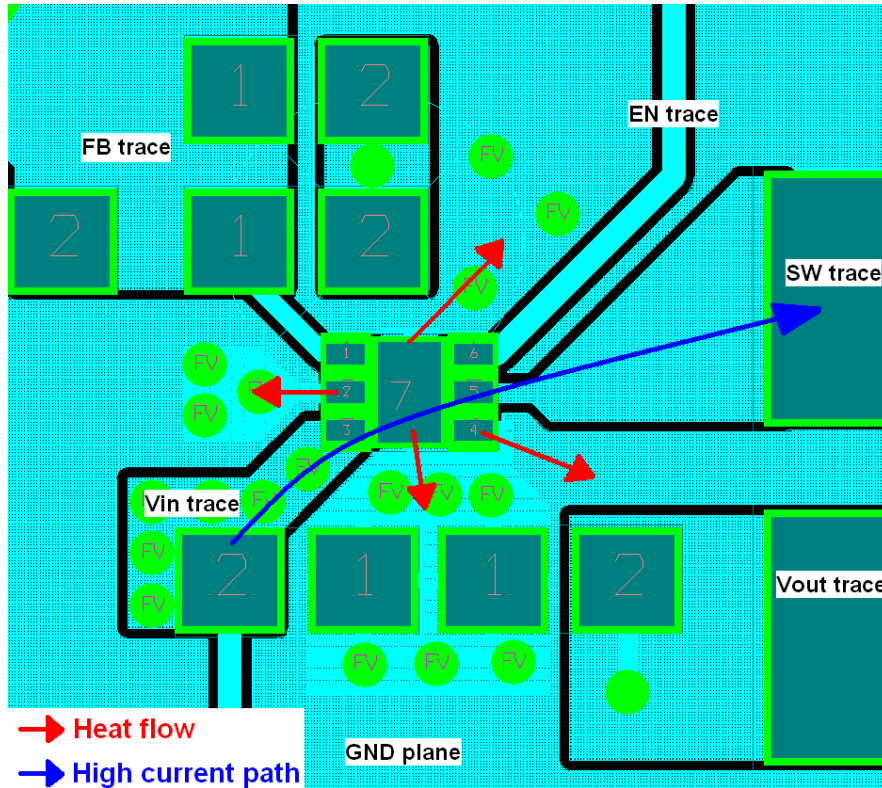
NCP1529 UDFN-6 Recommended Board Layout
